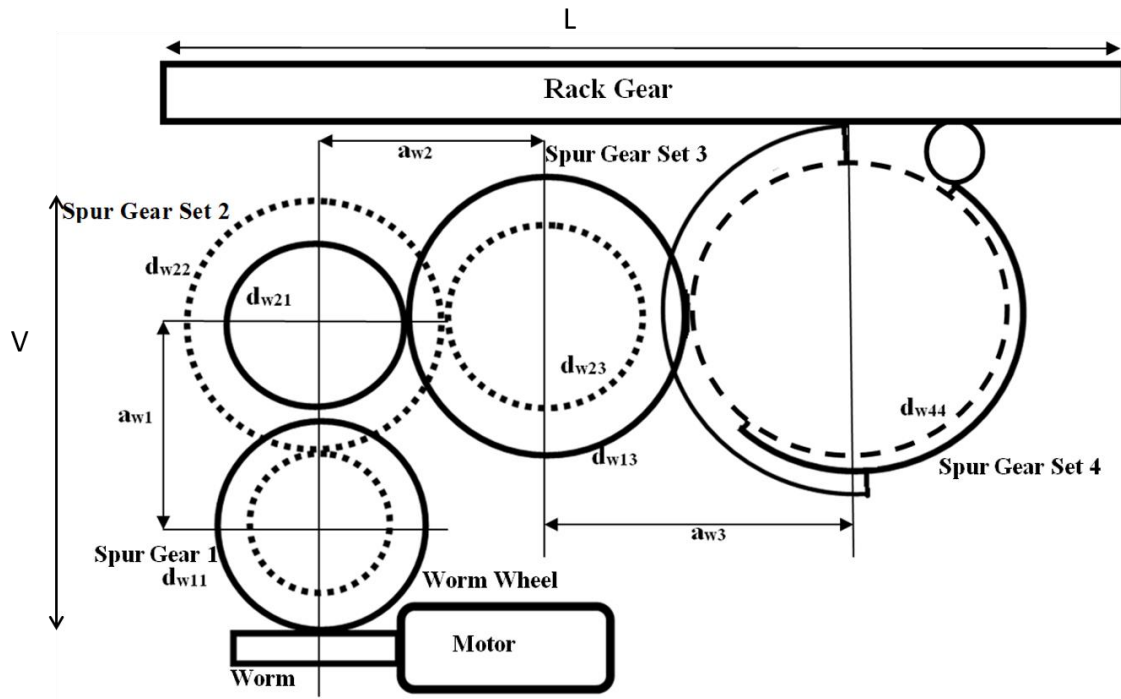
Block Diagram of Gear Motor Door Opening Actuator
